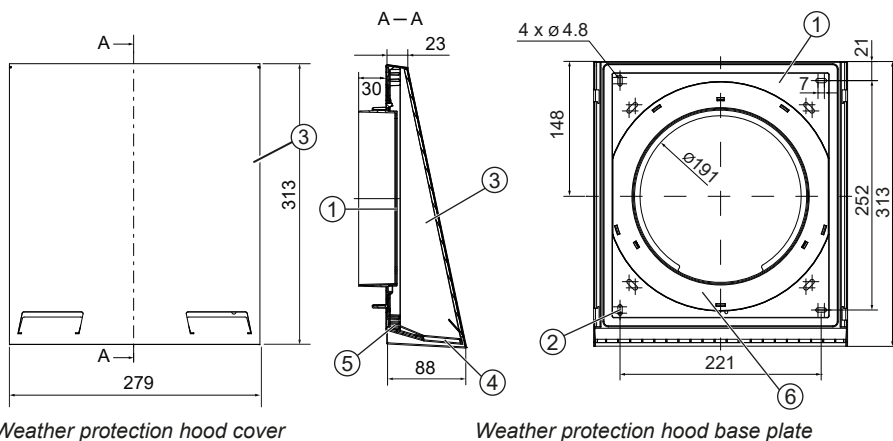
Dimensional drawing of the Flex Office weather protection hood
